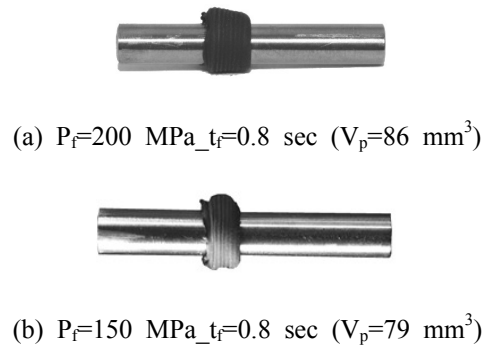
Appearances after friction welding of similar  $Zr_{50}Cu_{40}Al_{10}$  BMG specimens
